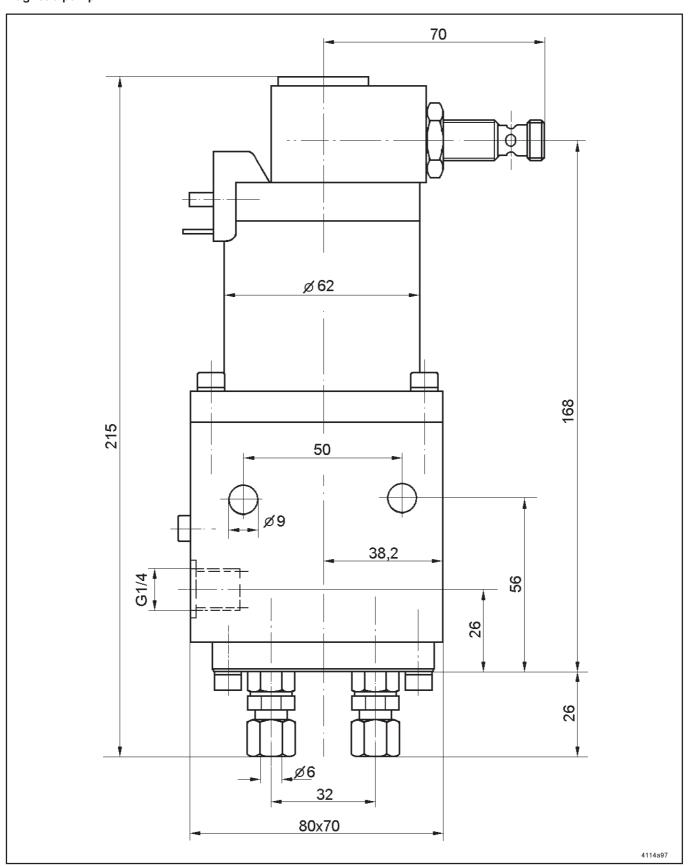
Dimensions of the pump PMA - 1 without magnetic plug
